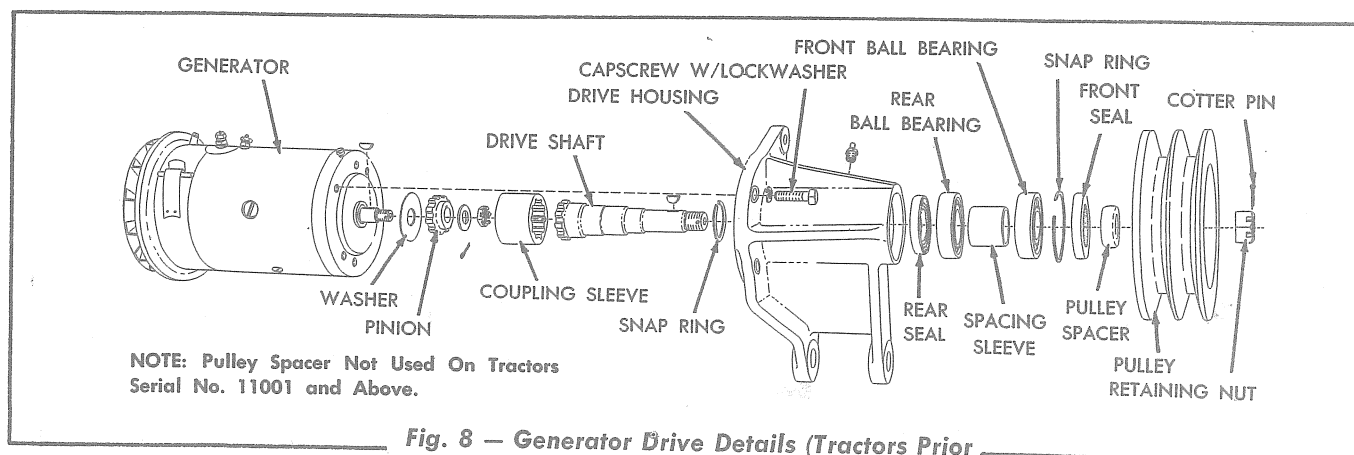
Generator Drive Details (Tractors Prior to Serial No. 4001 Shown — Tractors Serial No. 4001 and Above Similar)
